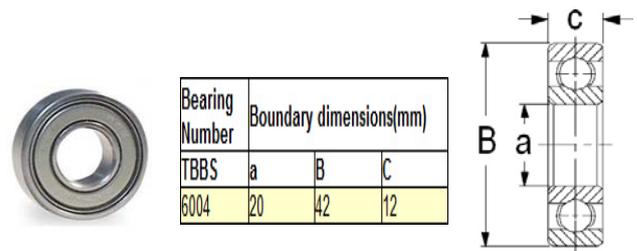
ZZ Radial Ball Bearing with cross sectional view and detailed dimensions
